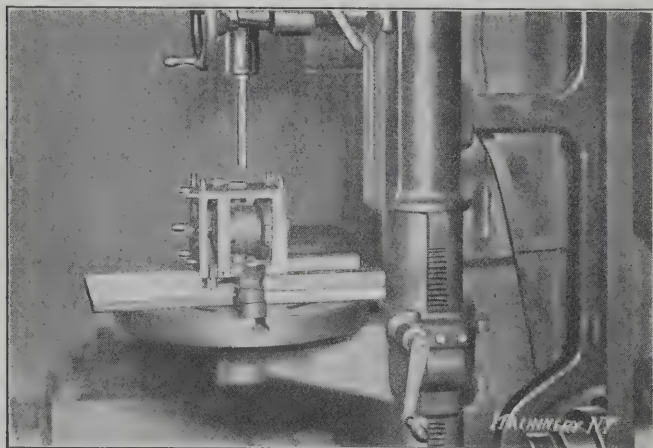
Jig in which Wrist-pin Holes are Reamed
